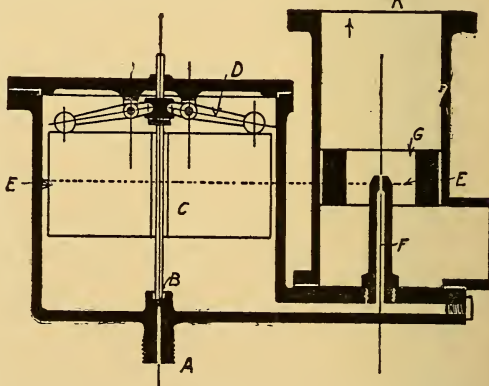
Jet Carburettor and Float Chamber. A. Petrol inlet. B. needle valve. C. Float which closes the needle valve B through the levers D when the petrol reaches the level EE. F. Petrol jet. G. Air nozzle. K. Inlet pipe to engine.
